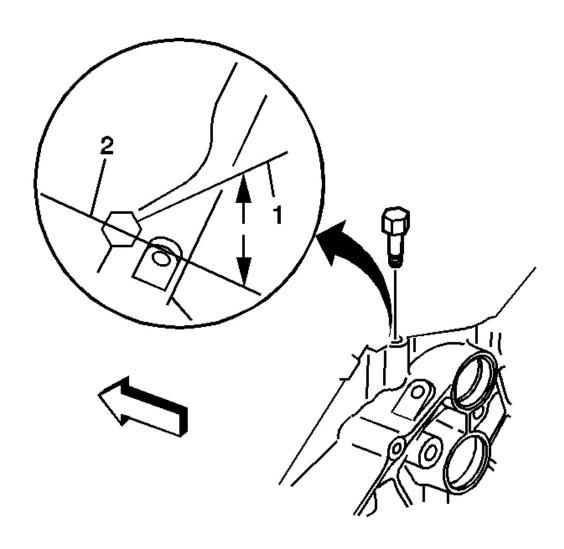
Engine Oil Pressure Sensor Proper Installation Position Courtesy of GENERAL MOTORS CORP.
